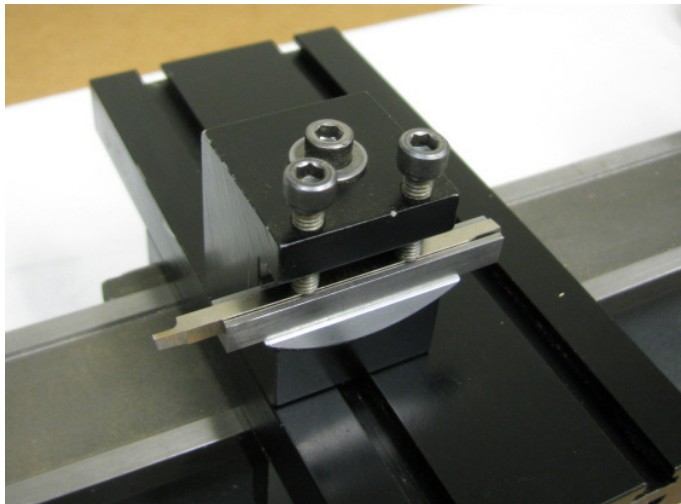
The holder and 1/8" tool in place on a Sherline 1/4" rocker tool post. Note that the top surface of the holder on either side of the channel is reduced in height slightly so the clamping screws contact the 1/8" tool itself.
